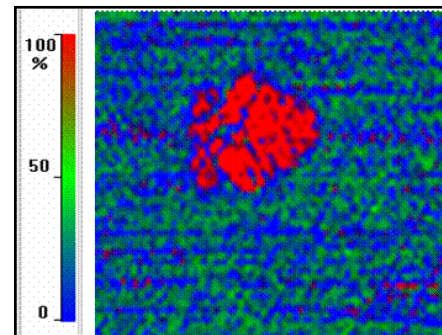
Ultrasonic imaging of 3 ft-lb impact damaged tube specimen
